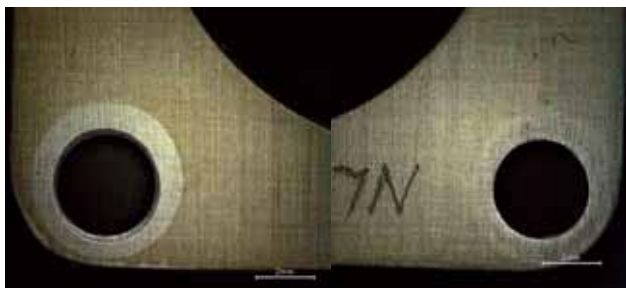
Aluminum plates removed from the 3<sup>rd</sup> retrieved unit
